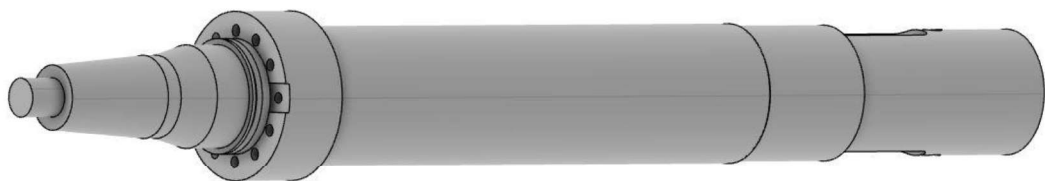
Solid Model of Shaft, Tool Holder, and Tool
